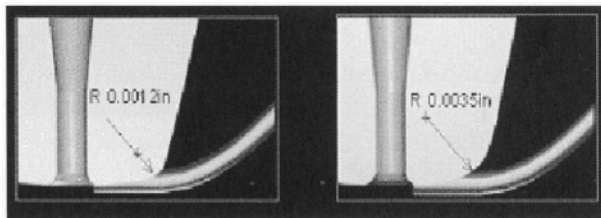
Stitch bonds made with a small and large O.R dimension tools
